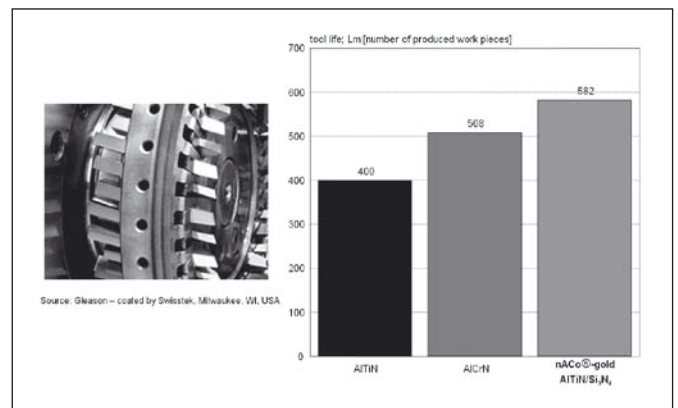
Milling of gears with conventional and nanocomposite coatings
